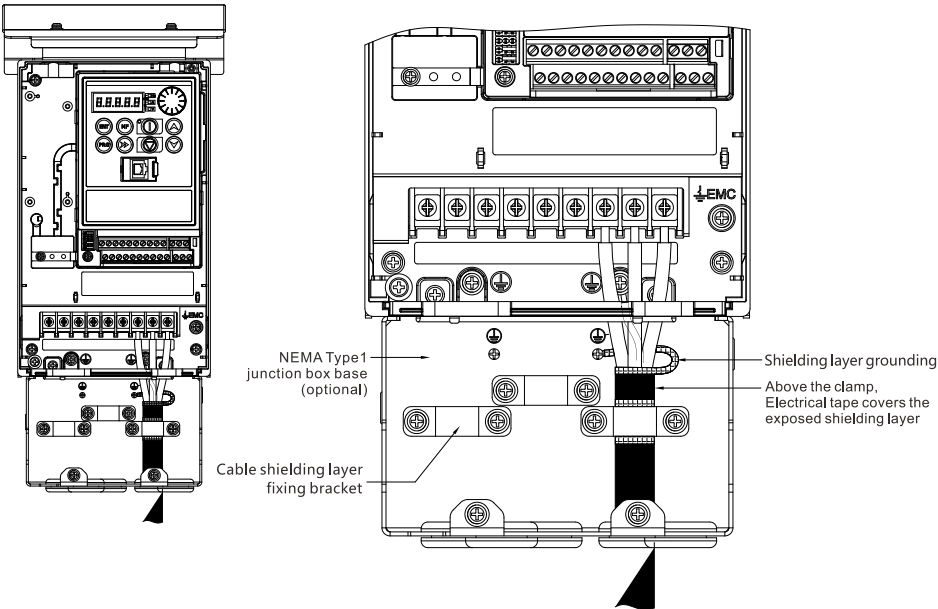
Shielding Layer Wiring (NEMA Type1 Junction Box)
